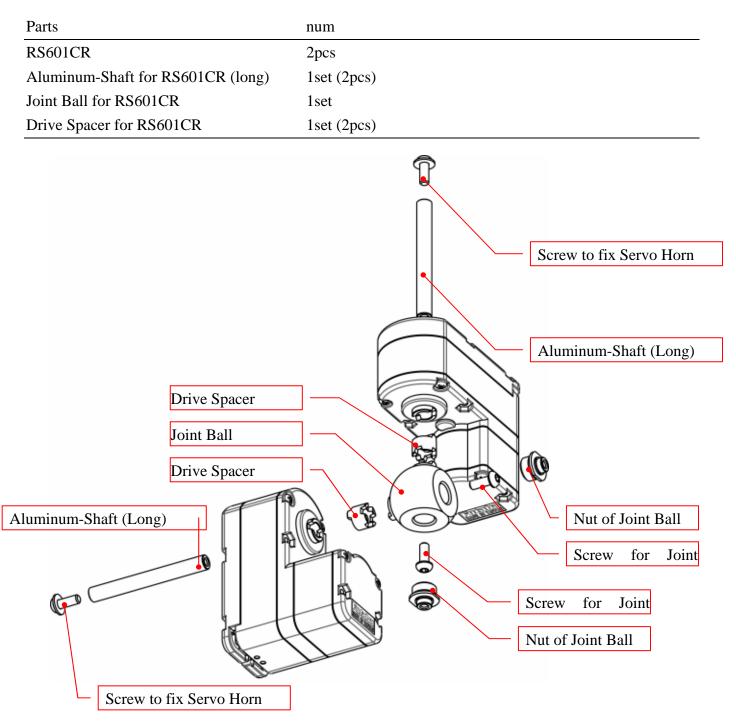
Image of assembling 2-Axis Joint with Joint Ball
